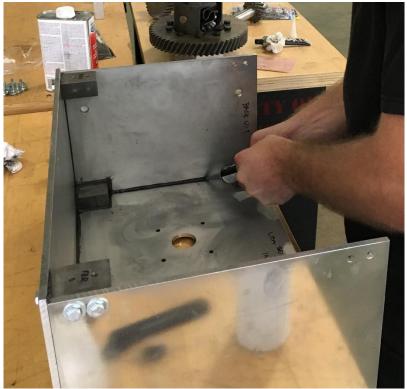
We put extra RTV in the corners of every joint and used a spreading tool to ensure the RTV made it all the way in the corner and clean any excess. The housing is sitting on the left side plate in this picture.
